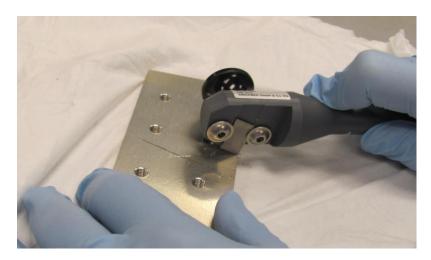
X-SCRIBE ON TOP OF BASE PLATE FOR BUTT JOINT
